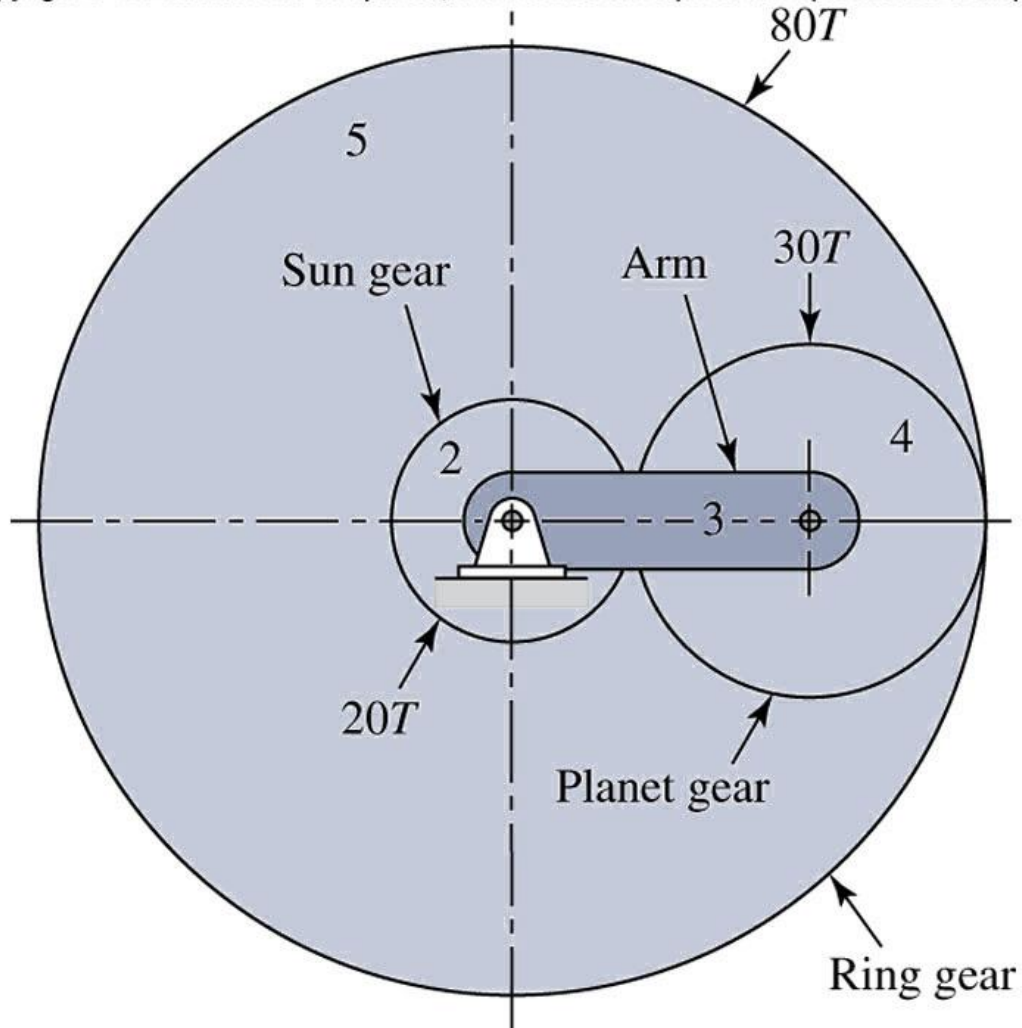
Planetary, or epicyclic, gear trains. Some of the gear axes rotate about others.
